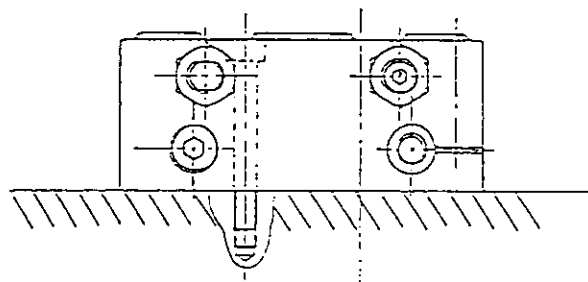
Fixing from upper (by hexagon socket head cap screw)
